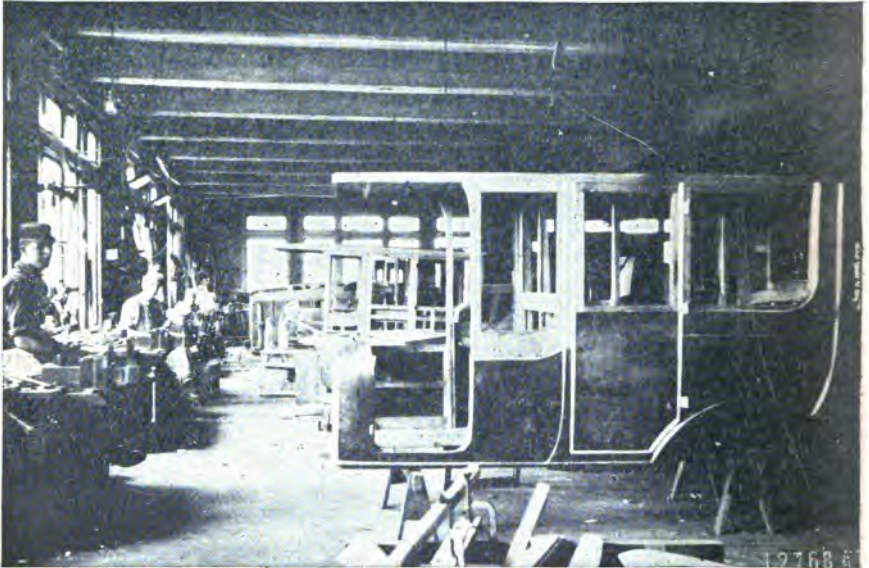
A small carriage maker who has converted his business to making automobile bodies.
